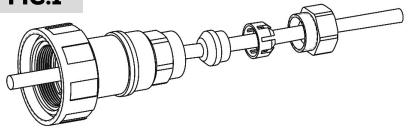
• Thread the gland nut, gland cage, gland and connector body on to the cable.
